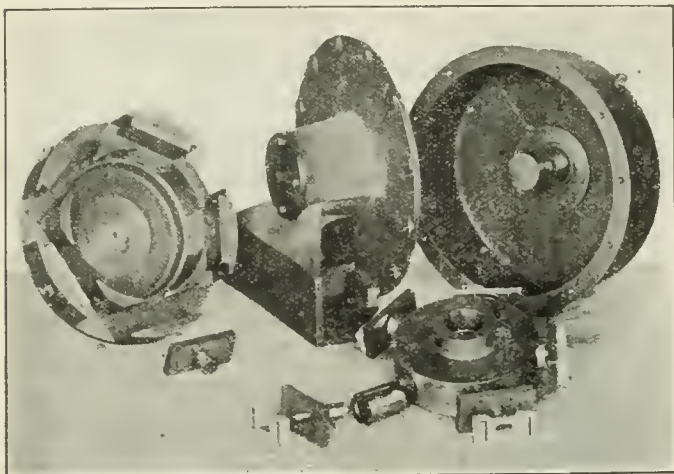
DISASSEMBLED VIEW OF DETACHED ROTARY MOTOR CONTROLLED BY OILGEAR HYDRAULIC TRANSMISSION
